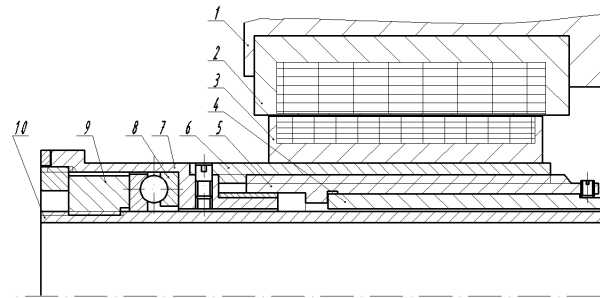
Longitudinal section of electrical ACM under the patent [5]
